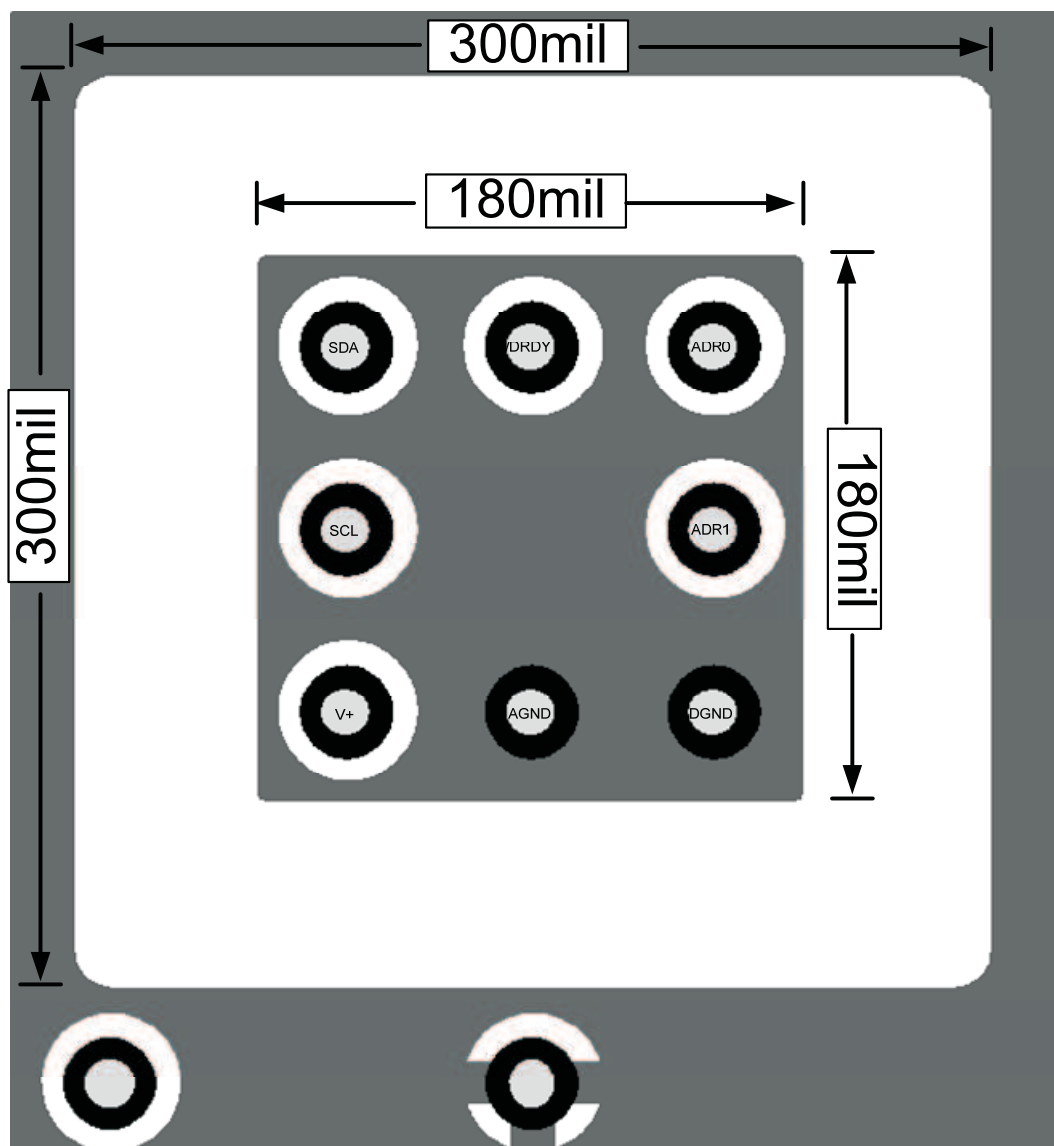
TMP006EVM Four-Layer PCB: Bottom
